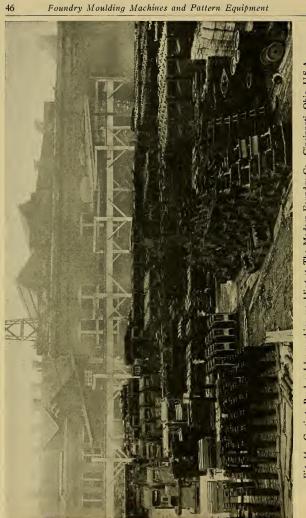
Castings Produced by machine moulding at The Modern Foundry Co., Cincinnati, Ohio, U.S.A.
